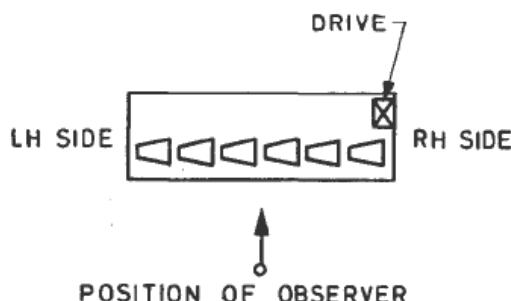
SIDE OF SINGLE-SIDED MACHINE
